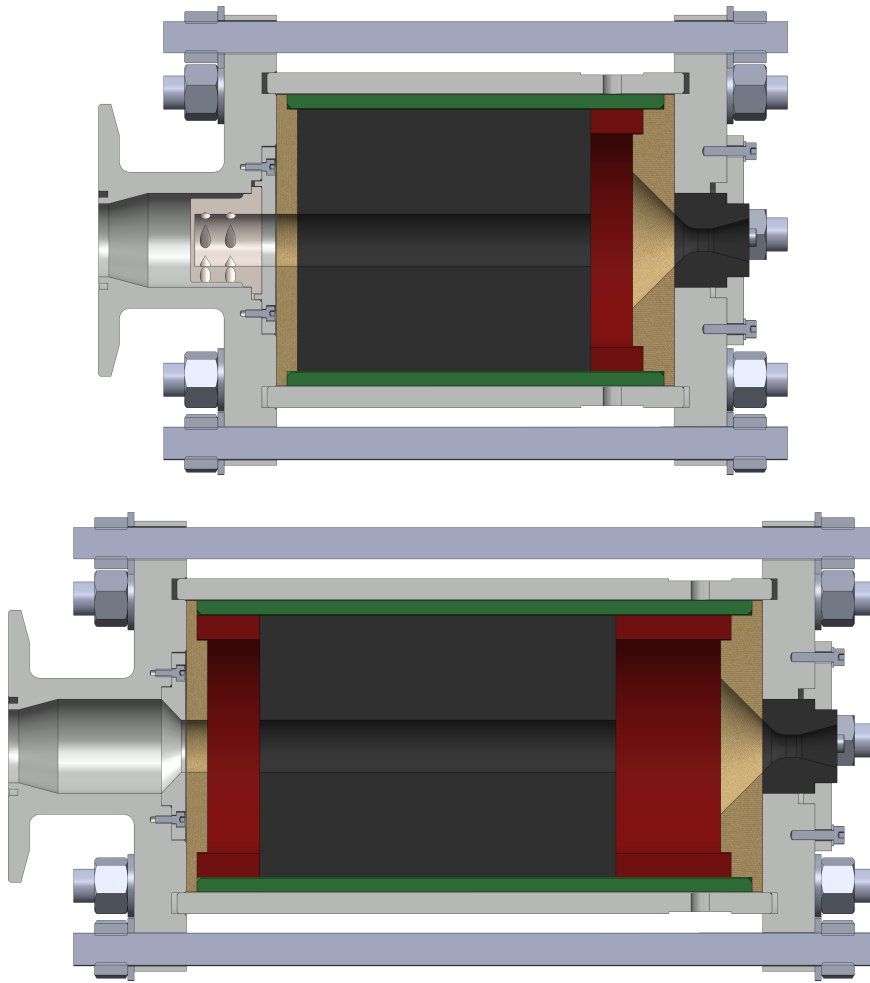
CAD model section view of the swirl injection (top) and the axial injection (bottom) hybrid rocket motor
